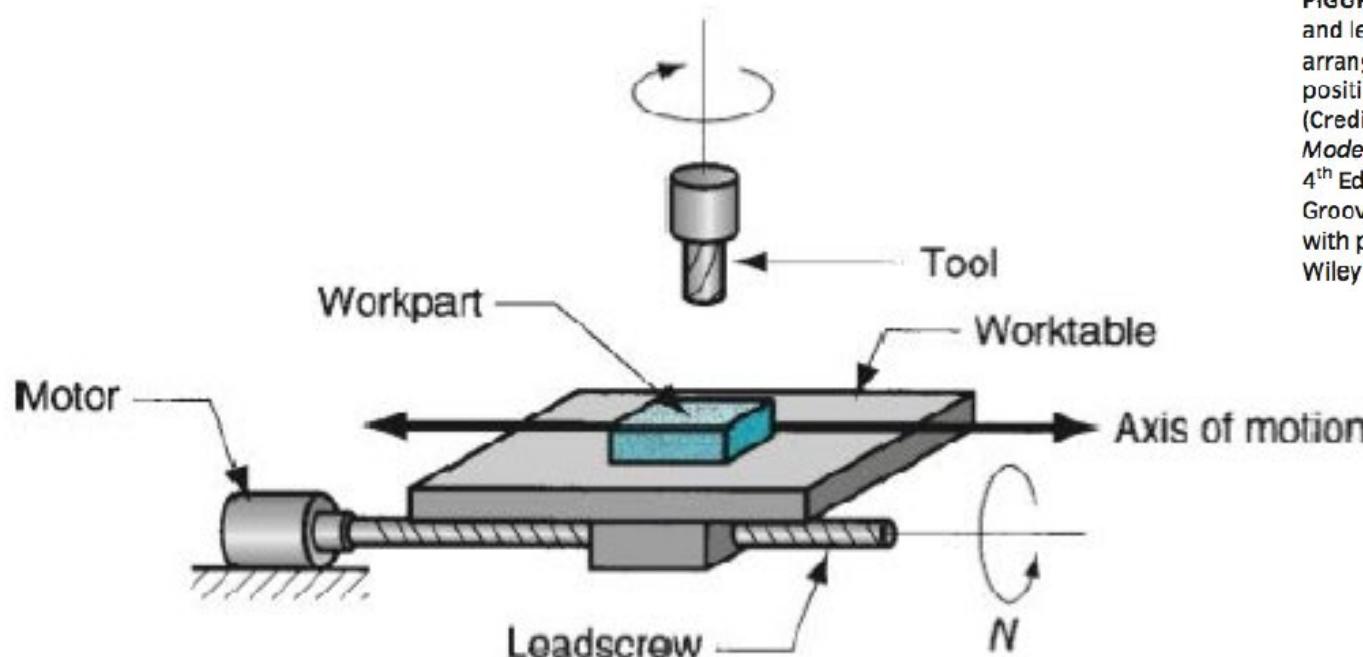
Motor and leadscrew arrangement in an NC positioning system.
